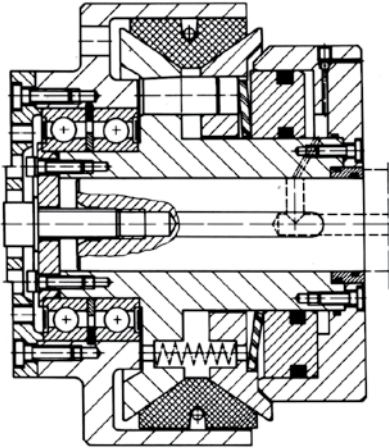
Conax® Friction clutch type CHFA hydraulically actuated for universal joint
